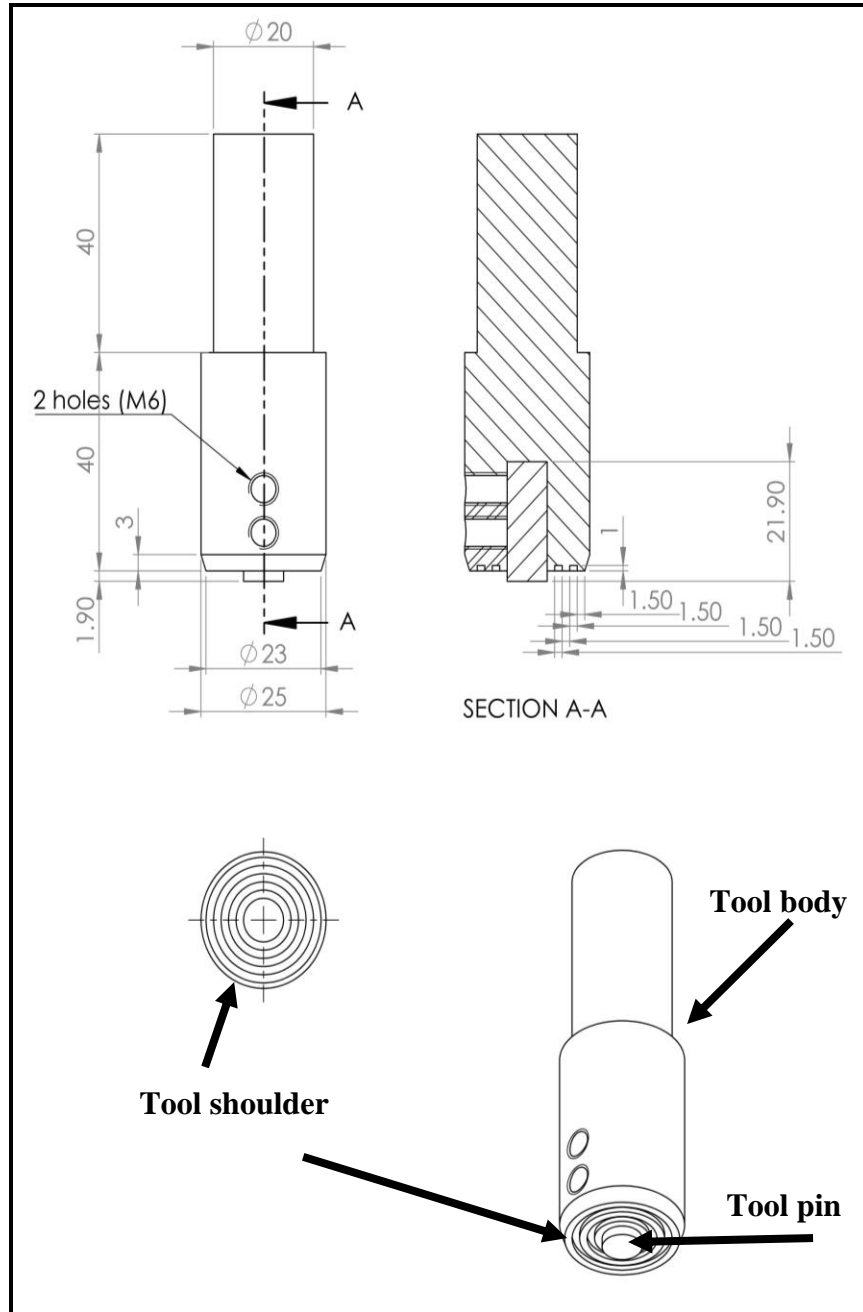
FSDC tool body, tool pin and shoulder. (All dimensions are provided in mm)
